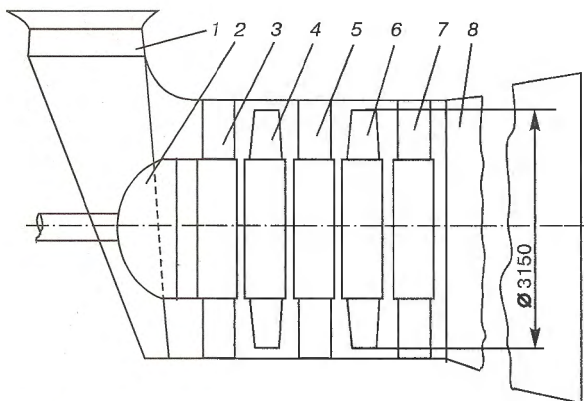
Two-stage axial DOD-31.5 smoke exhaustor: 1 – inlet box; 2 – fairing; 3 – inlet vane device; 4 – first impeller; 5 – intermediate vane device; 6 – second impeller; 7 – straightening device; 8 – diffuser
